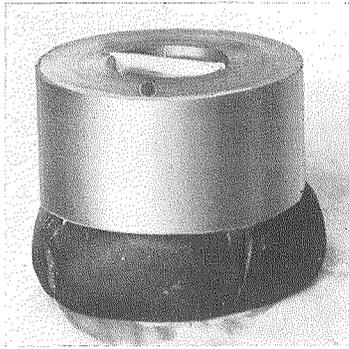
Swaging Ring Resting on Moldine Base Ready for the Counterdie Metal
